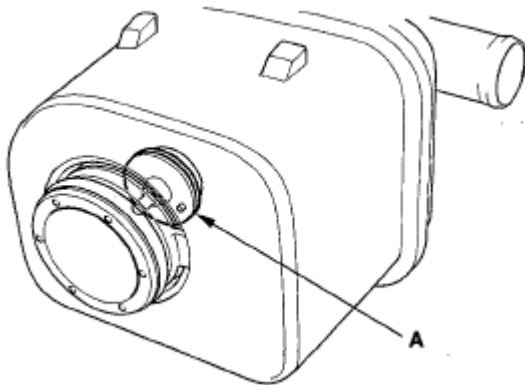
Identifying EVAP Canister Vent Shut Valve
